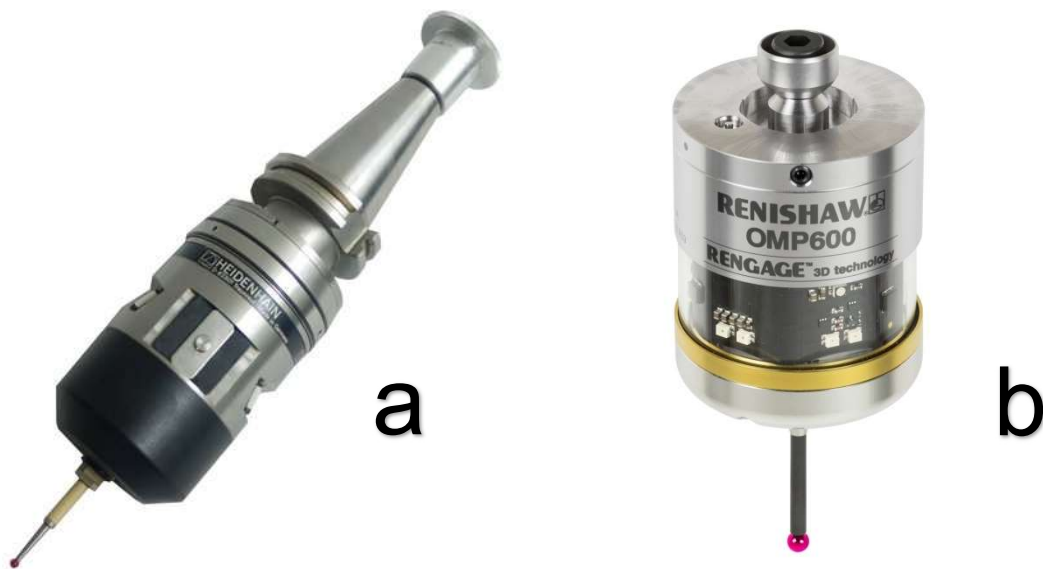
Typical machine tool probes from a) Heidenhain [8], b) Renishaw [3]
